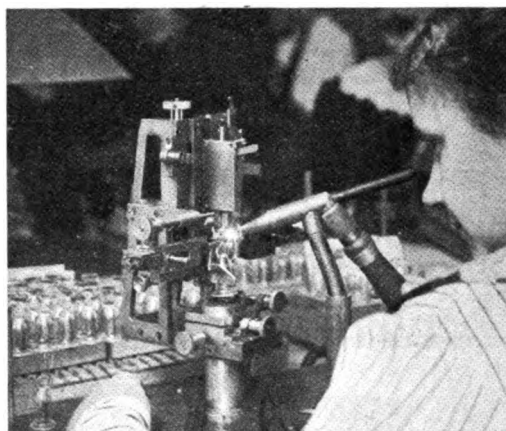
A machine which forms and welds the electrodes.
